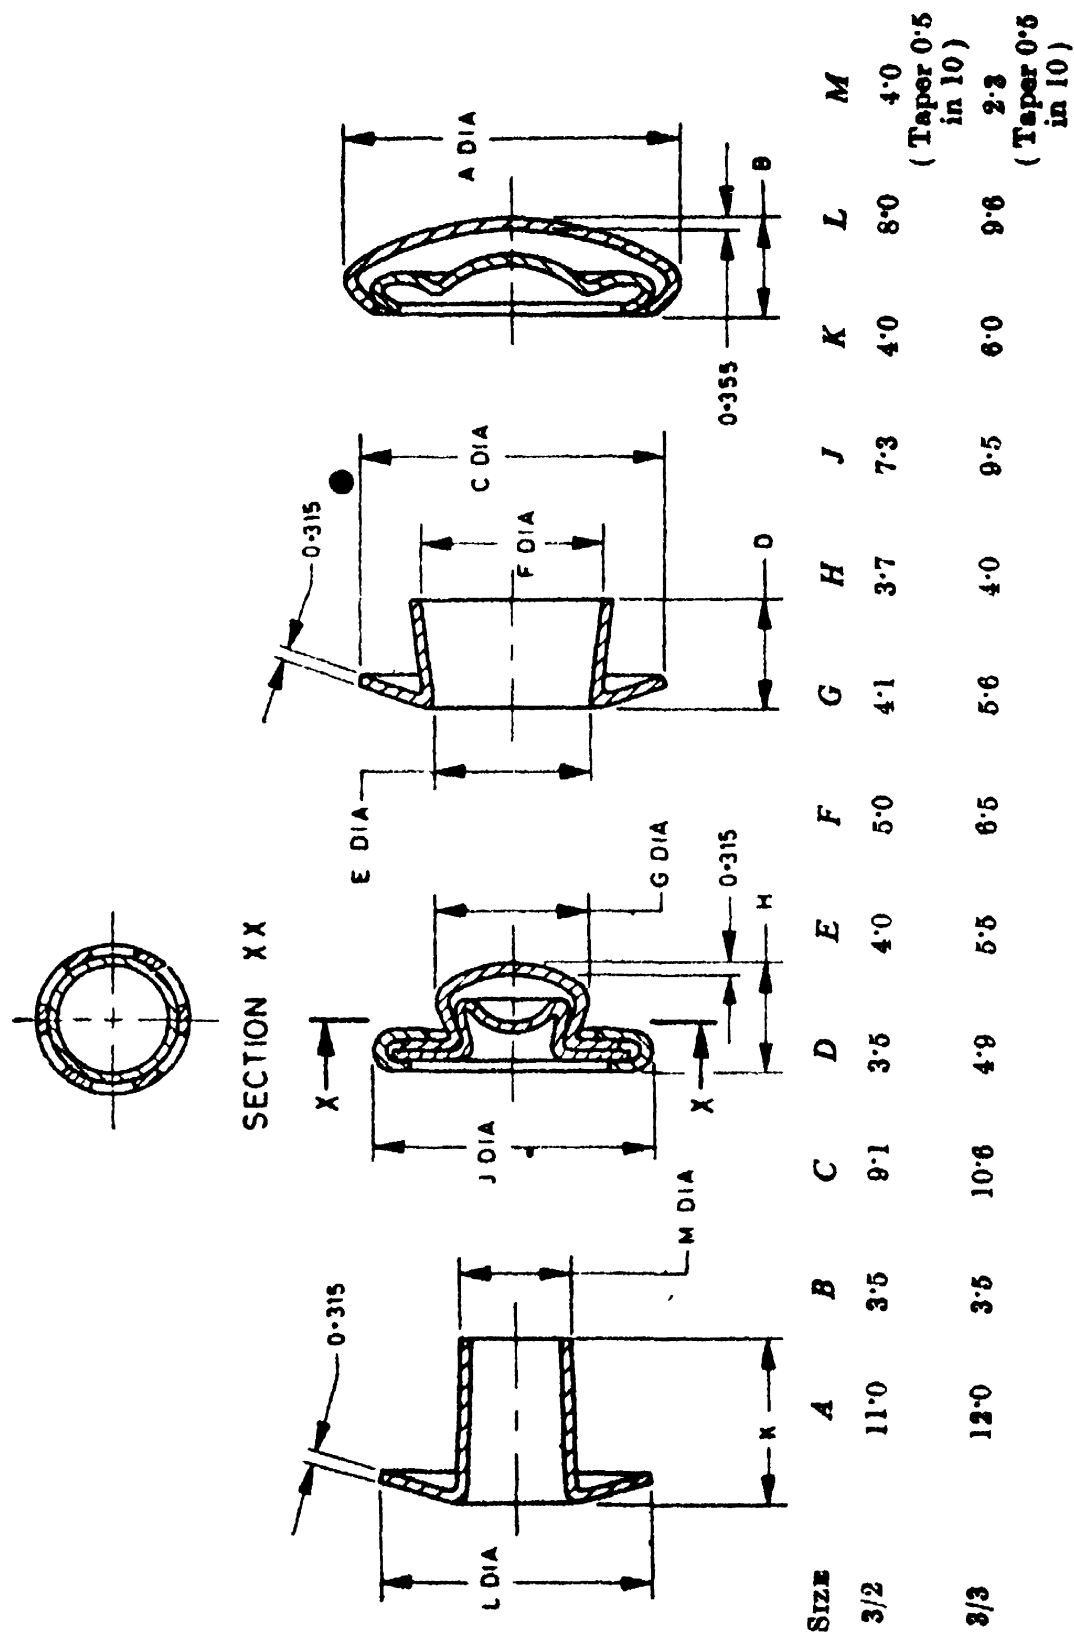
SNAP FASTENER (FOUR PIECES), CAGE TYPE, SIZES 3/2 and 3/3
